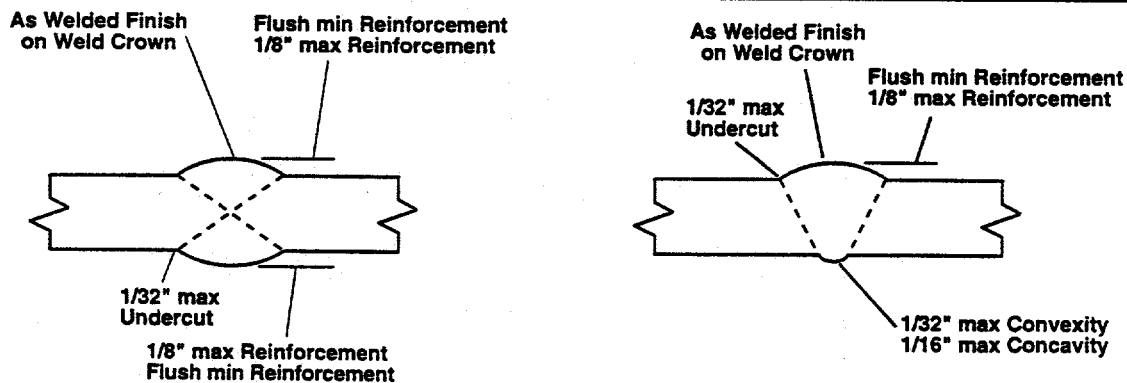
Primary Tank Weld Joint Configurations for Double-Shell Tank Fabrication
